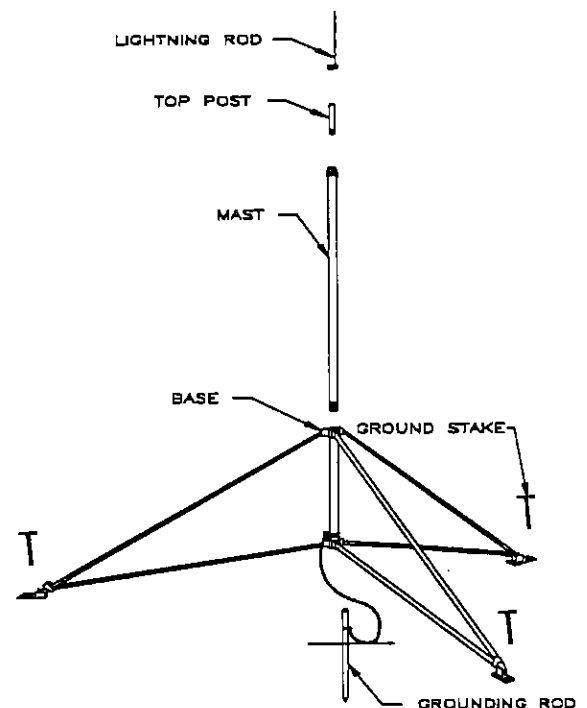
CM10/CM6 Tripod Assembly Drawing
